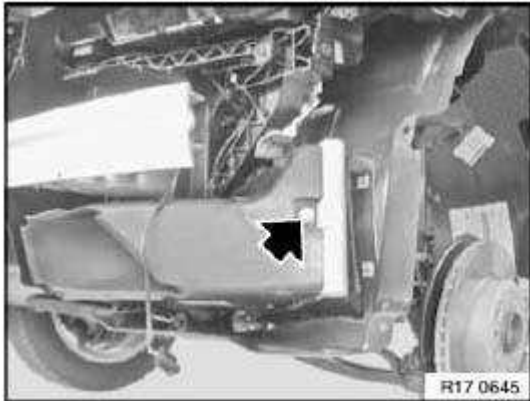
Locating Mount Air Duct On Engine Oil Cooler
